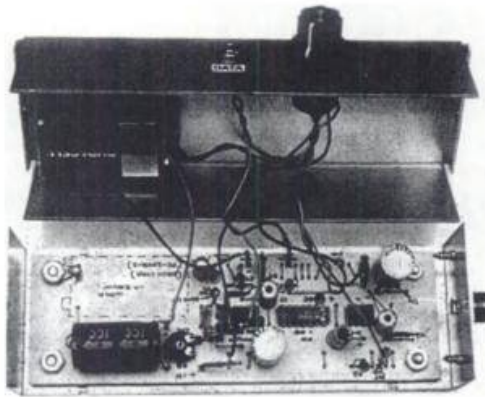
A component template cemented to the pre-drilled PC board will simplify assembly.
